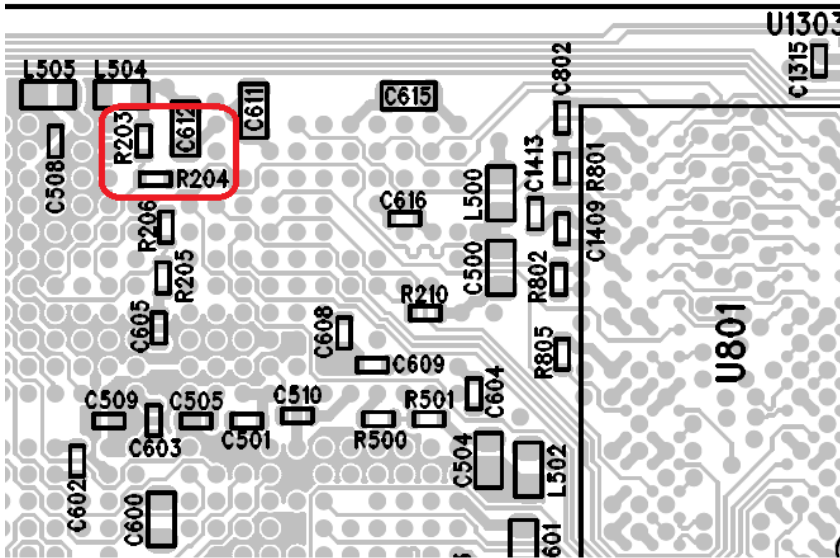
Pull-Up During Configuration (PUDC) Resistors - Assembly Drawing Bottom View (upper middle part)
